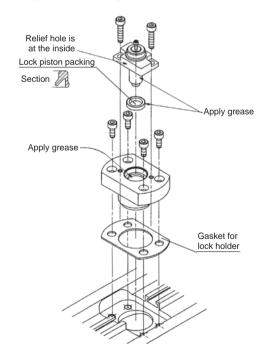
Reassembling of end lock part (Ø50, Ø63)
